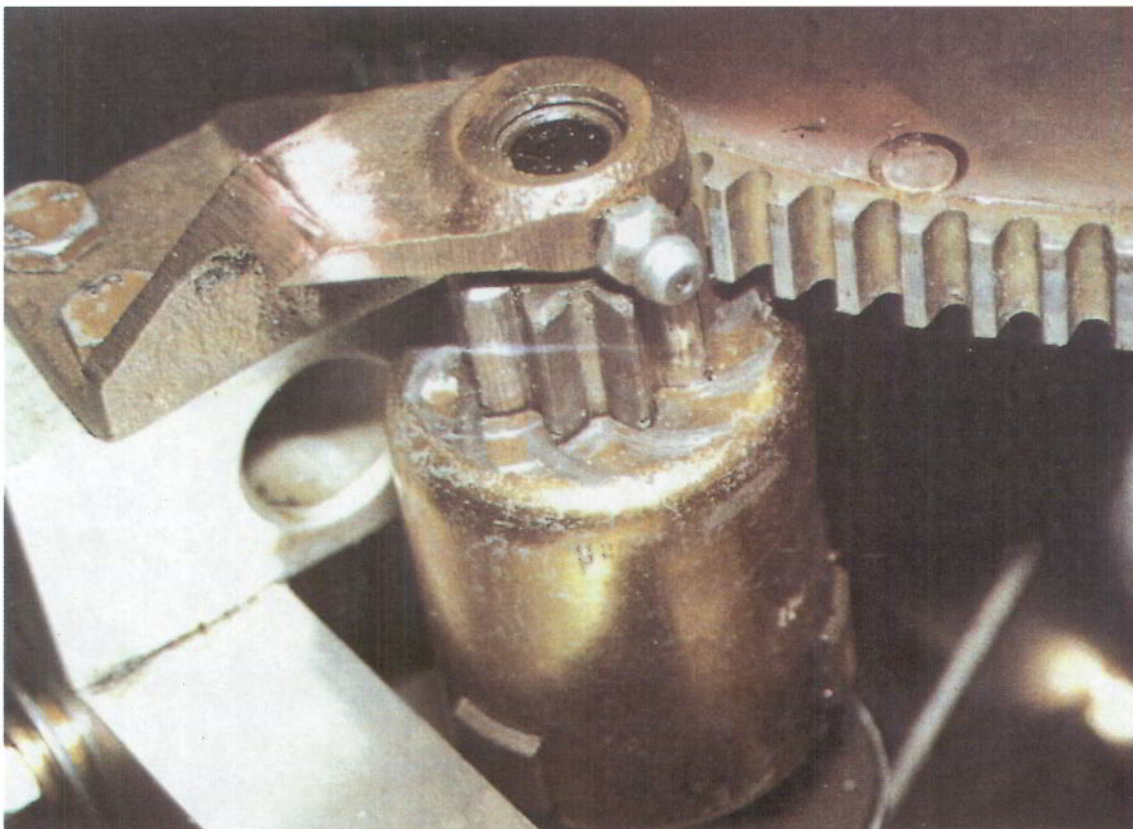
Drive pinion in engaged position; note gear teeth marks on bell housing
